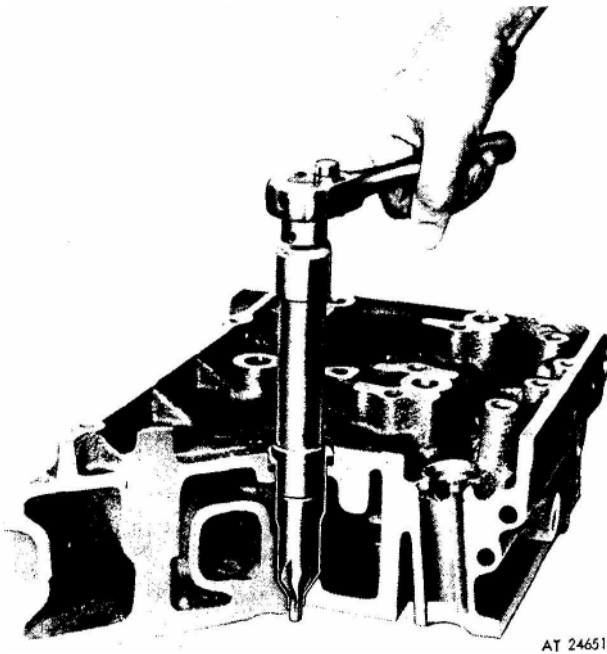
Reaming injector tube for injector nut with reamer J 5286-9.
